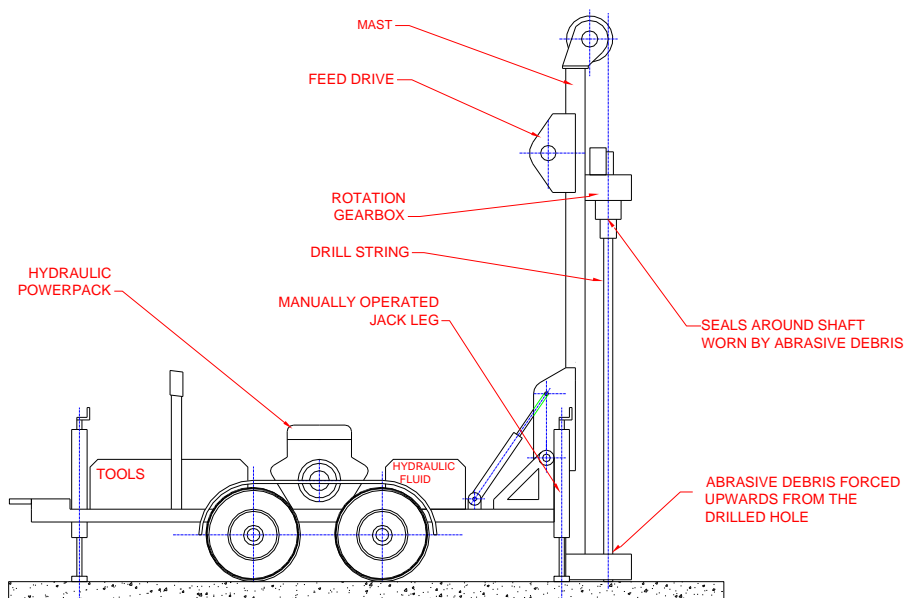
Trailer Mounted Water Well Rock Drill Used in Remote Areas [1.1]
